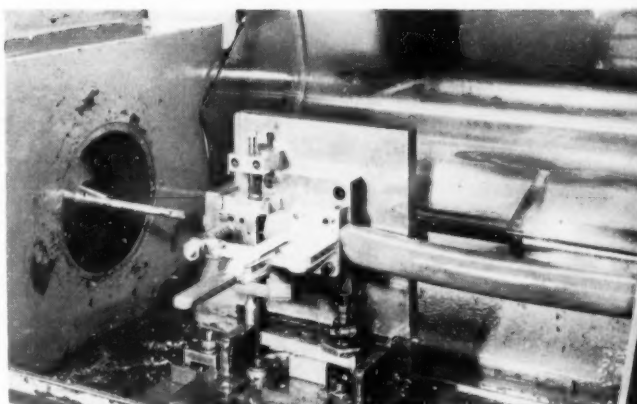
Setup for drilling three holes in a steel block with a single-flute gun drill.
